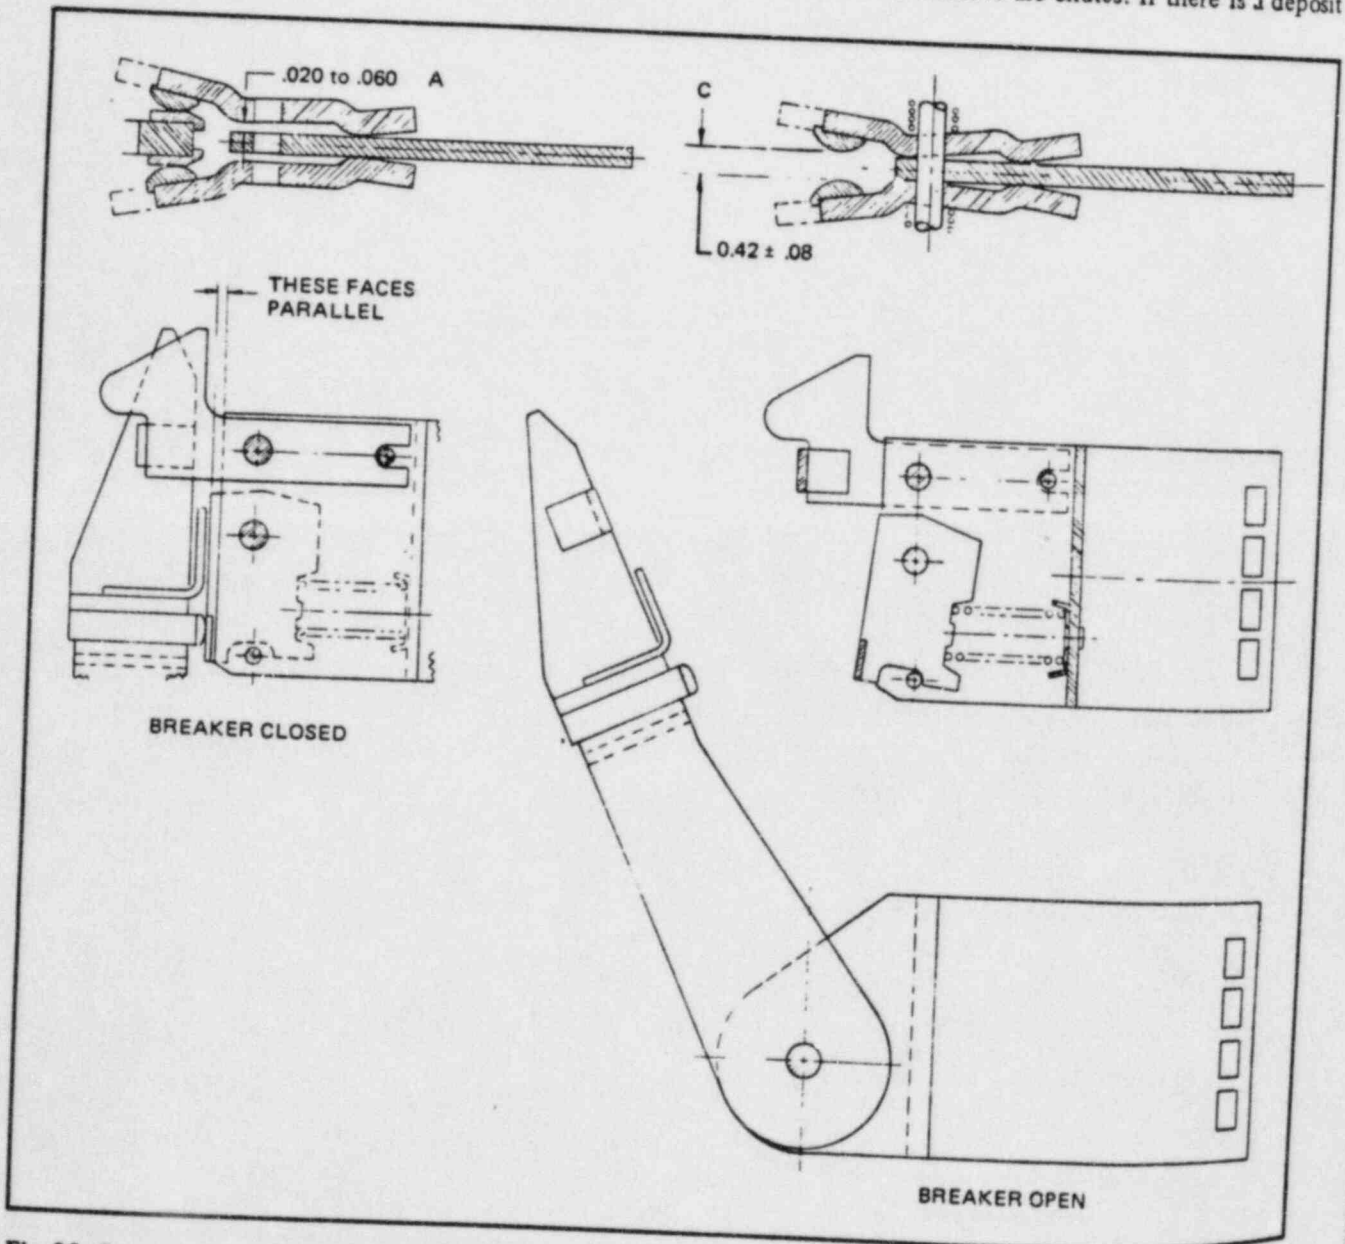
Contacts and their Adjustment, DS-416/420 Breaker
